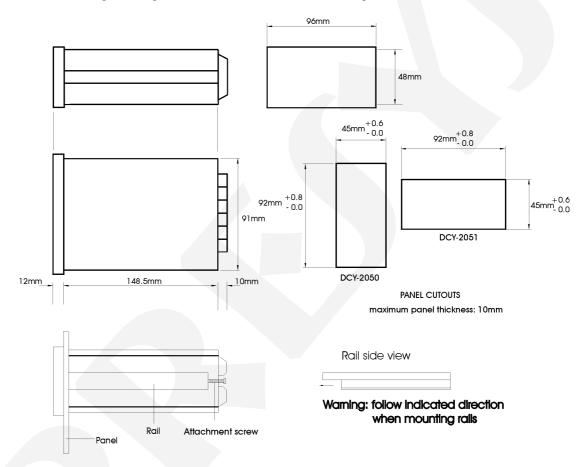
Dimensional drawing, panel mounting cutout and side view
